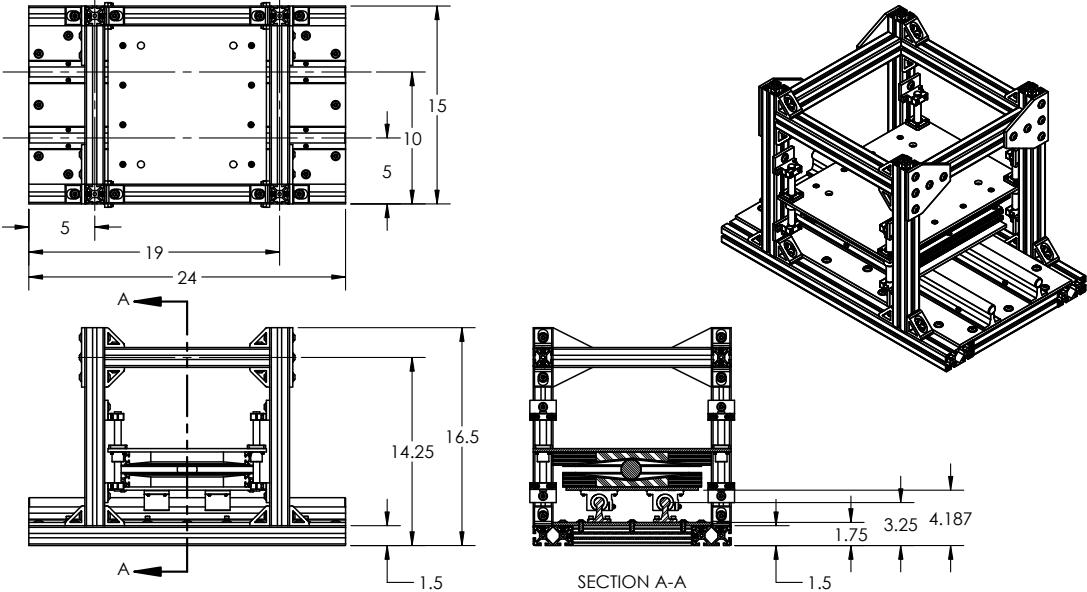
Drawing of the lower assembly of the experimental setup. (units: in.)
